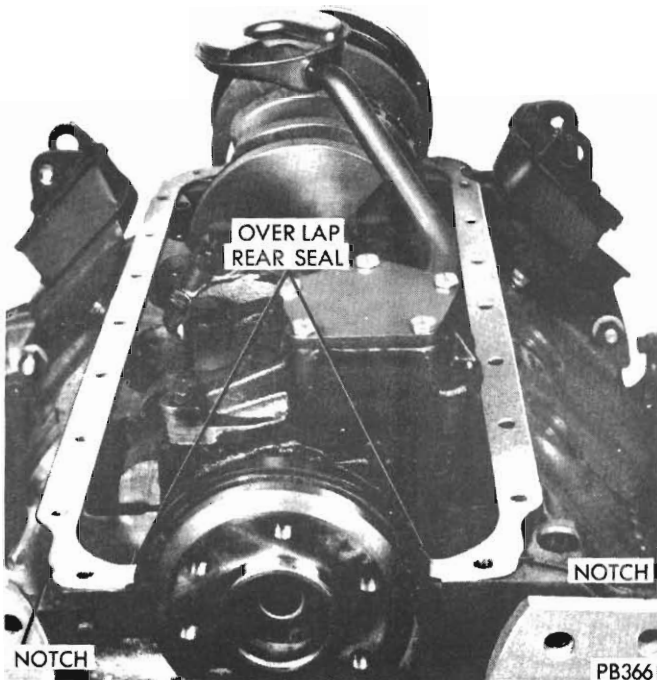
Pan side gaskets and rear seal installation (360 c.i.d. engines)
